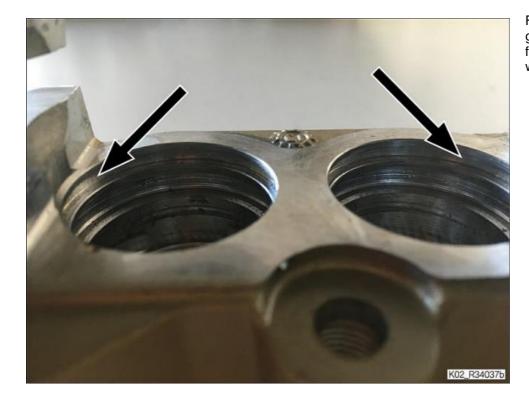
Base of the groove (arrows) of the front dust scraper ring without corrosion
